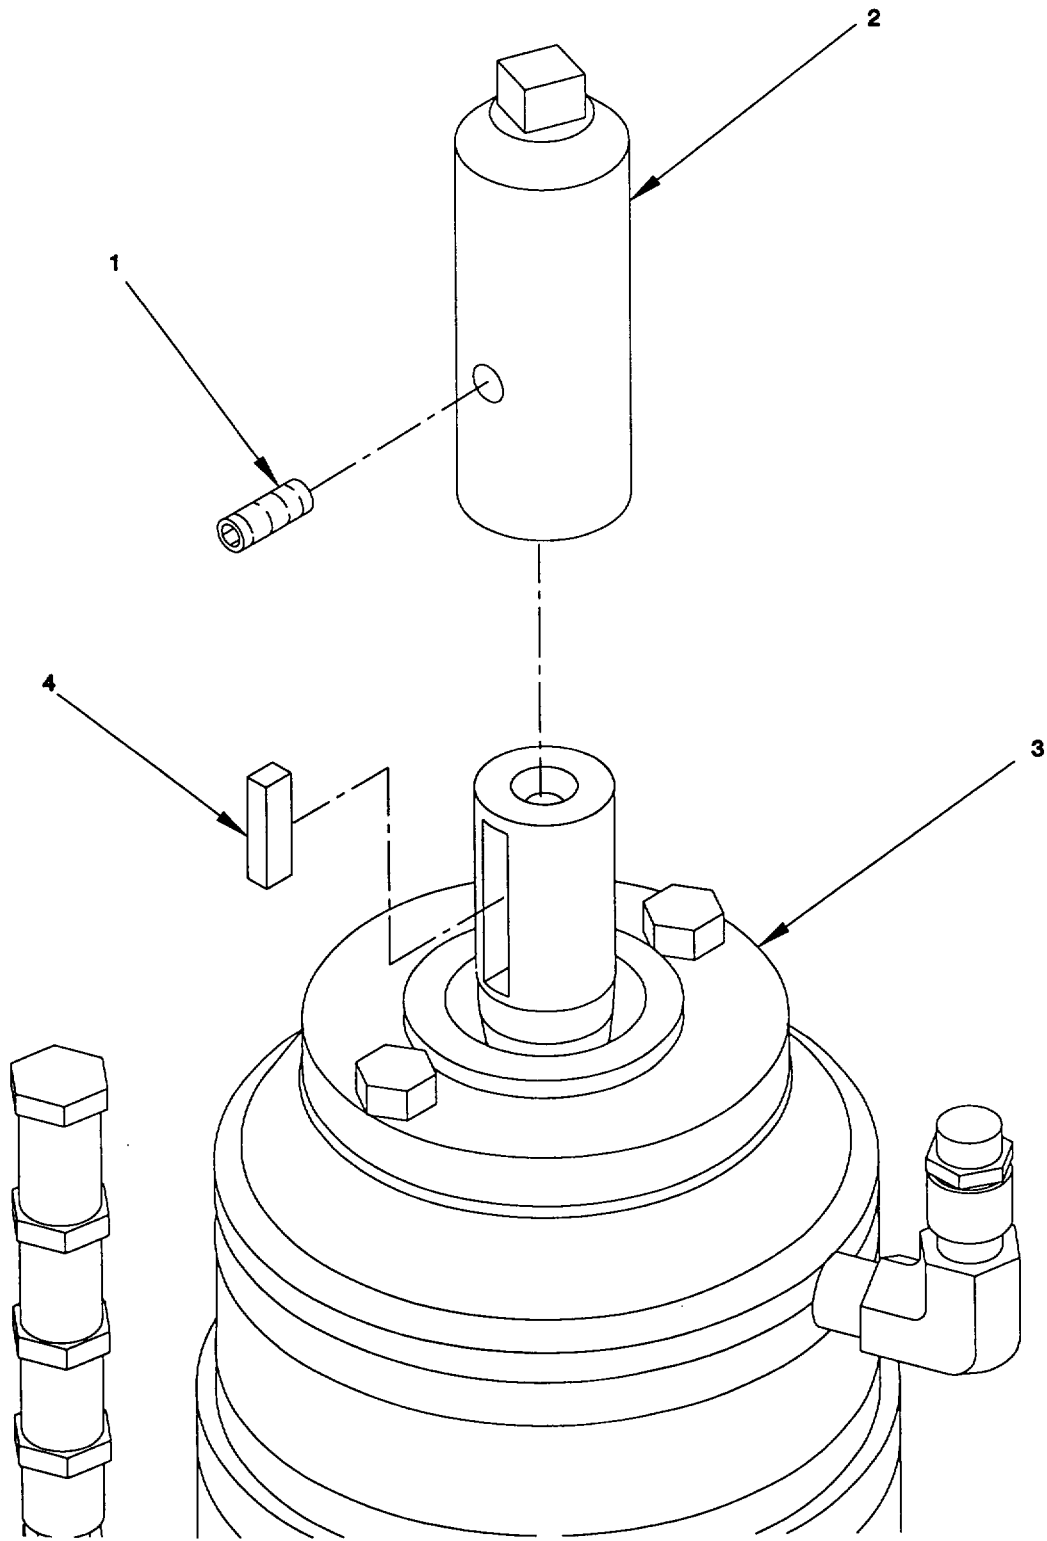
Emergency Steering Adapter, Remove/Install.
